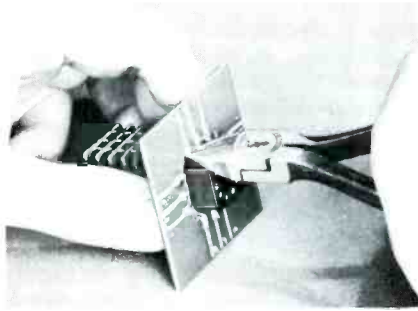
Cutting Risers on Module Which Has Tube Socket.
